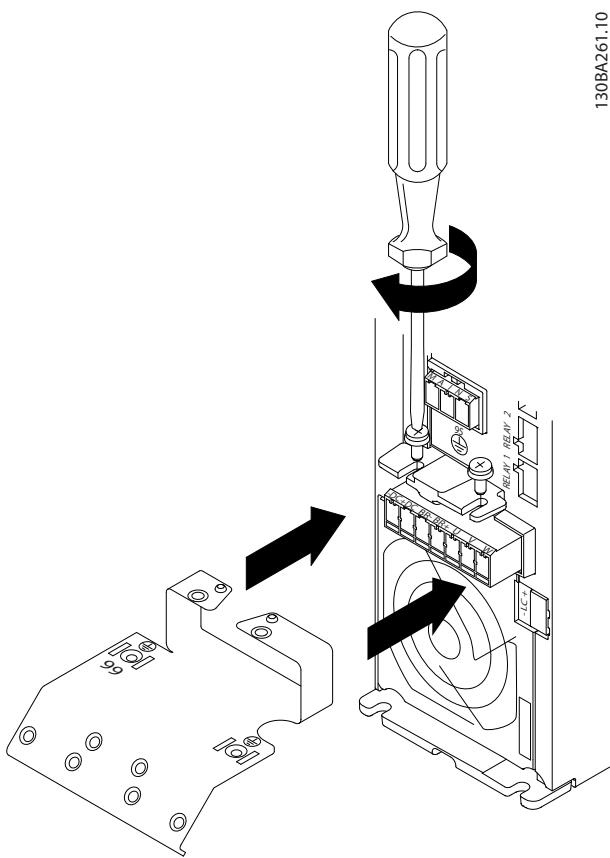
Mount the two screws in the mounting plate, slide it into place and tighten fully
